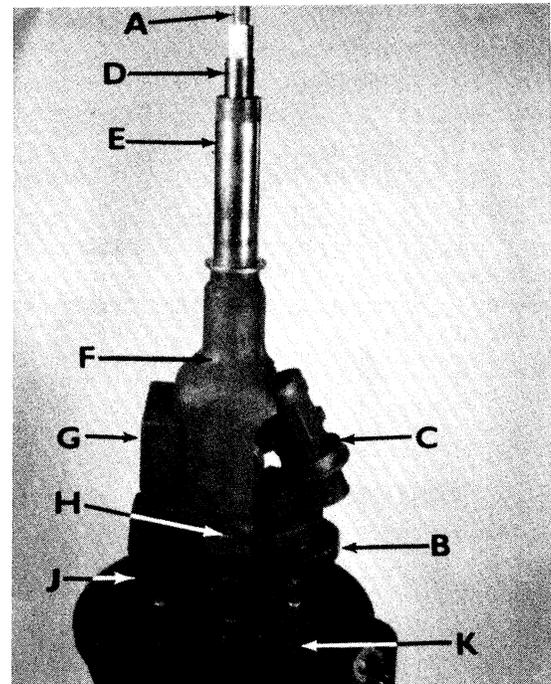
Checking Clearance between Sleeve and Brake Torque Plate
